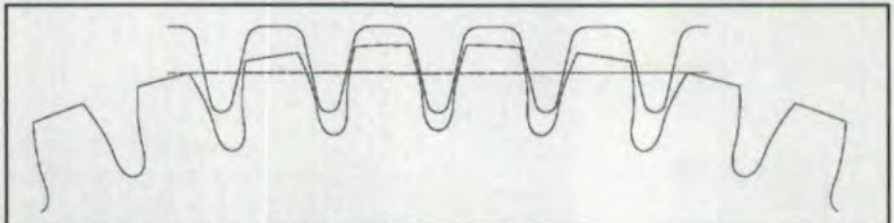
Thinned worm tooth, thick gear tooth modification.
